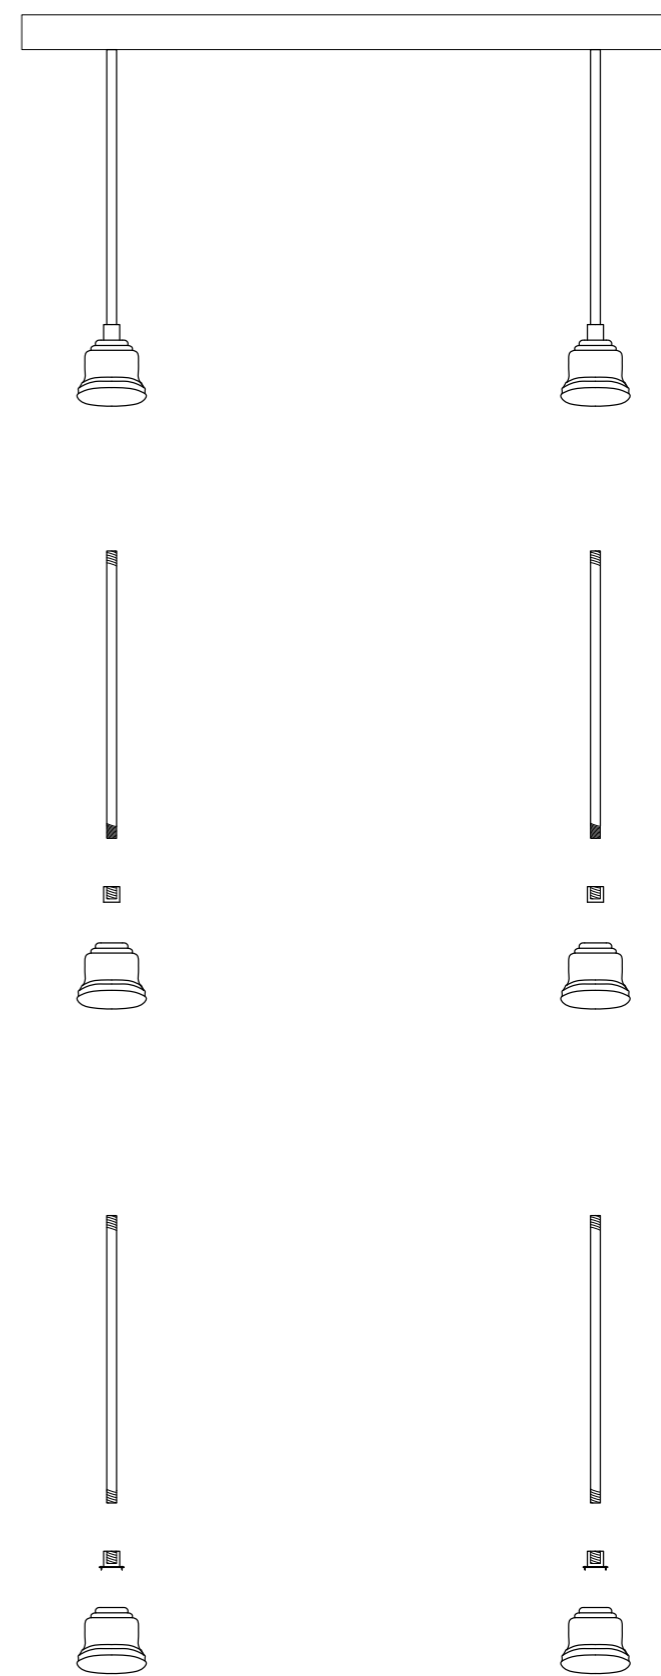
Detail 1. Lamp detail reconfigured as table legs.
